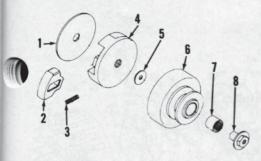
Exploded view of clutch used on saw engines.
